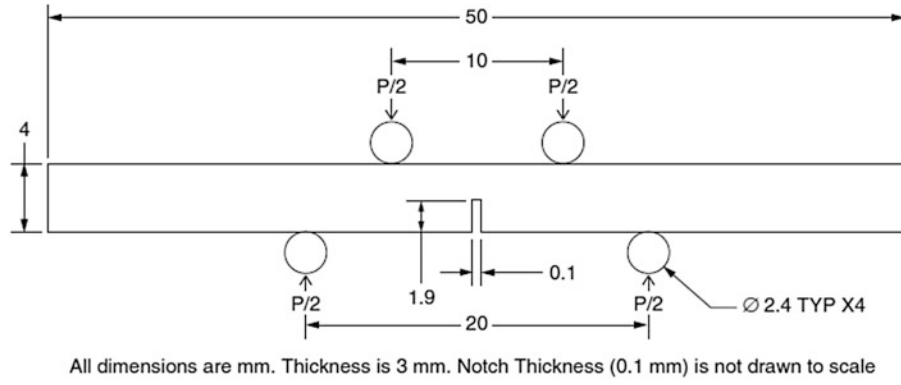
Schematic of specimen and four point bending test fixture geometry [4]
